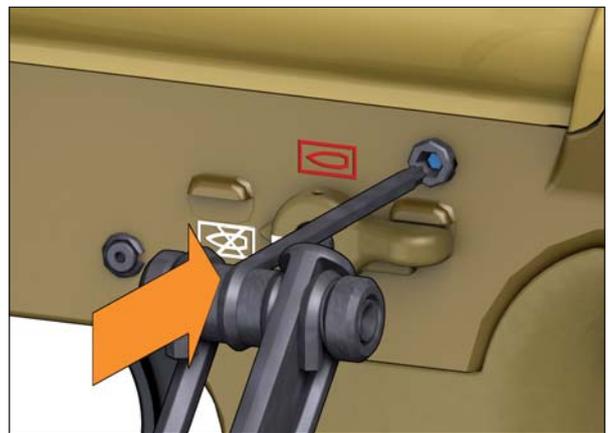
Pressing in the rear locking pin with disassembly tool
